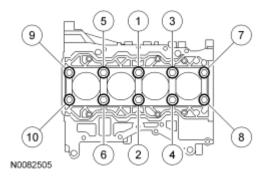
Identifying Main Bearing Beam Bolts Tightening Sequence
